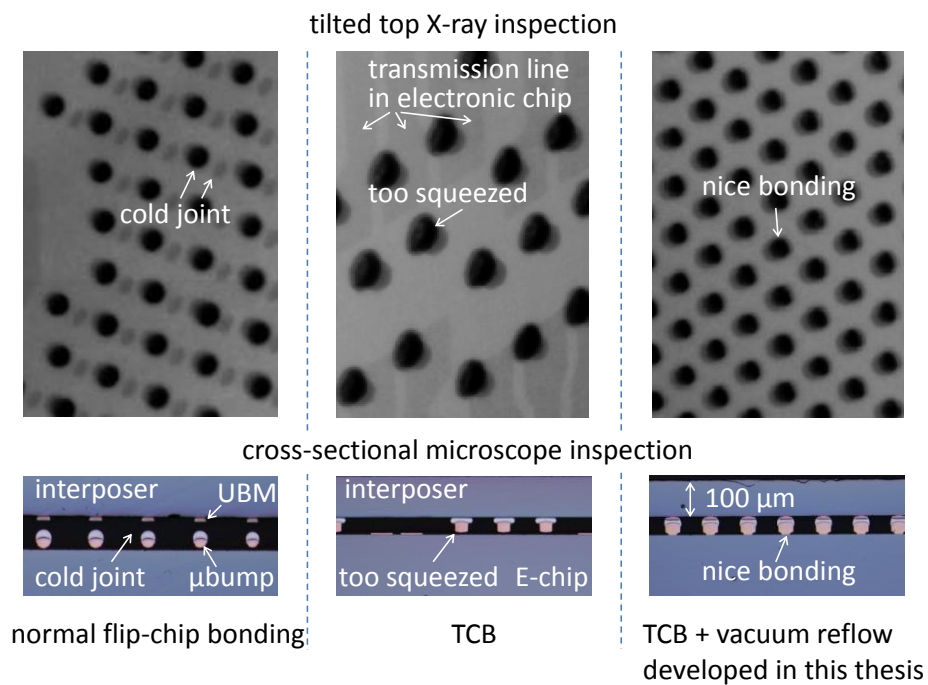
The X-ray inspection and the cross-sectional microscope inspection between the developed flip-chip bonding technology for the photonic interposer, and the other traditional flip-chip bonding technologies in the setup chips.
